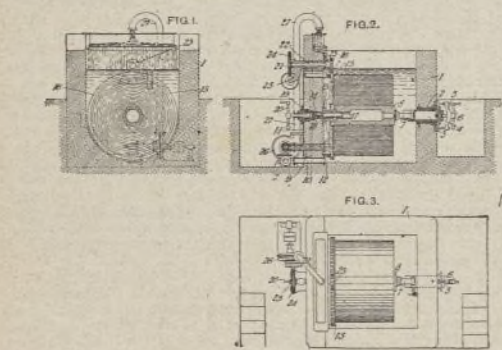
is a plan of the apparatus according to the invention. There is constructed a tank 1 of cement, building into its end walls fittings for centring the mandrel on which fabric is rolled, and also communicating pipes. In the right-hand end is built a cylinder 2 which may be of iron, as no part of it is exposed to the liquid in the tank, and in this cylinder is fitted a hollow gun-metal plunger 3 which passes through a stuffing box and carries a nut 4 which engages a screw that passes through an external yoke 5 and can be turned by a handle 6 so as to slide the plunger to and fro. The front part of the plunger 3 forms a seating open on the upper side to receive a sleeve 7 fitted on the end of the mandrel 8. In the left-hand end of the tank near the bottom are built gun-metal pipes 9 and 10, an external frame 11 which may be of iron, and an internal frame 12 of gun metal which has a hollow cylindrical boss 13 projecting into the tank, and a tubular boss 14 projecting to the outside. On the boss 13 is mounted, free to revolve, a perforated disc 15 having teeth around its periphery, and having a flange 16 at its back turned true and fitting against packing held in an annular groove formed in the face of the frame 12. In the boss 13 is fitted a round-ended plunger 17 have a screw-threaded part 18 screwing through a nut 19, its outer end passing through a stuffing box to an external handle 20, by which it can be turned in either direction. In the upper part of the left-hand wall of the tank is built a box 21, in which are bearings for a spindle 22, having fixed on it a pinion 23, gearing with the teeth on the disc 15. On the outer end of the spindle 22 is fixed a worm-wheel 24, gearing with a worm 25 on a spindle worked by a belt or otherwise from any convenient motor. The pipe 9 is connected as a suction pipe to a rotary or other suitable pump 26, from which a discharge pipe 27 extends upwards and terminates in a bend, so as to deliver liquid into the upper part of the tank. The apparatus is worked in the following manner:—The plunger 3 being retracted a few inches, and the plunger 17
